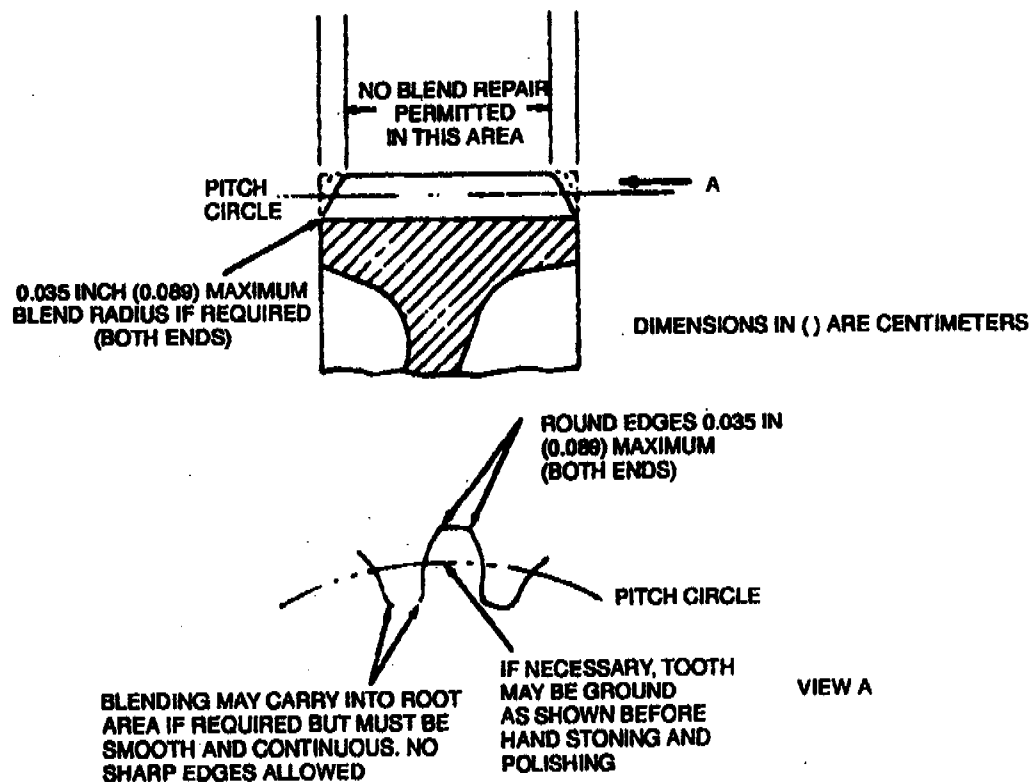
Helical Planet Gearshaft- Repair Limits (T53-L-13B, -703).
